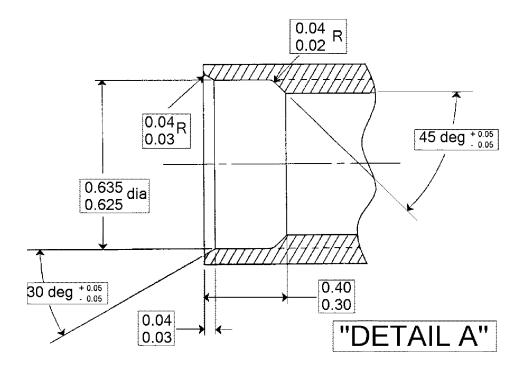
Fabrication of Expandable Pin Cleaning Tool Detail
